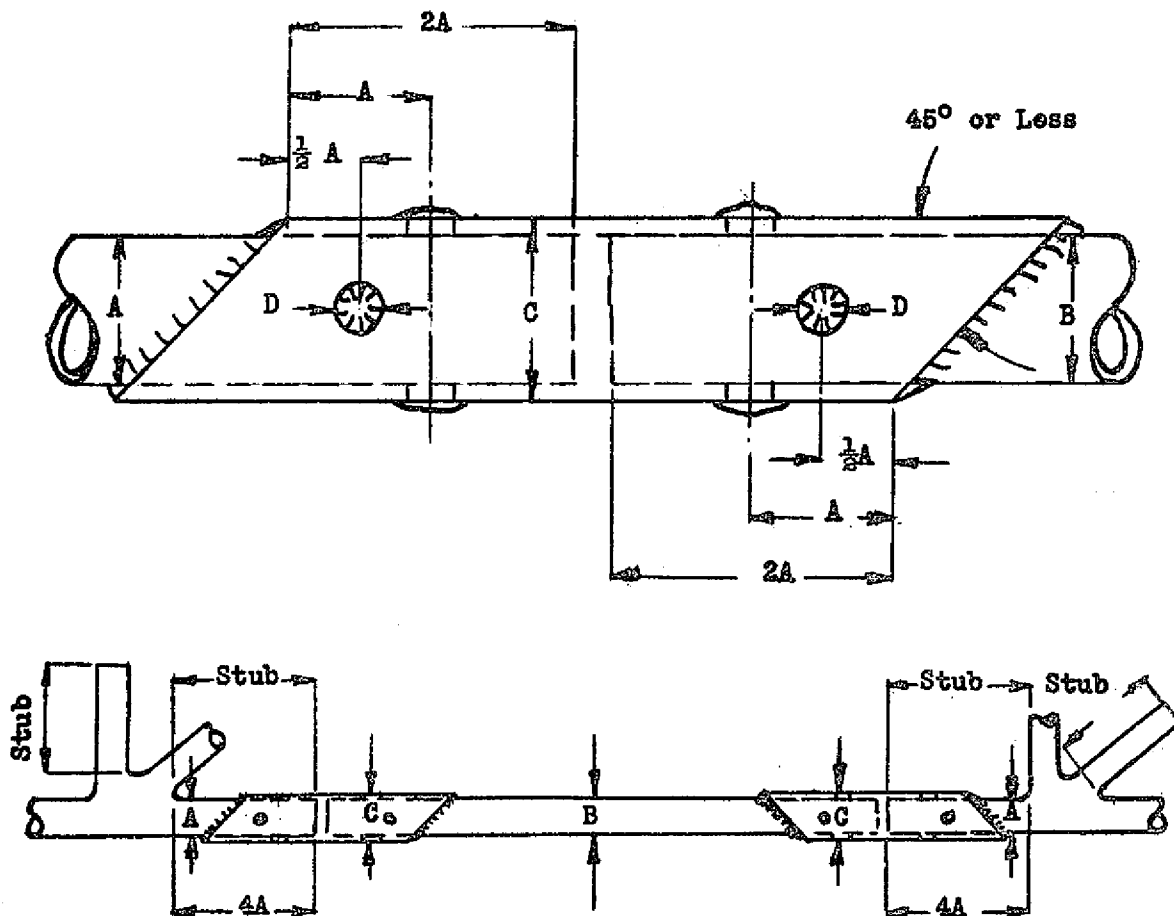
TYPE OF SPLICE USING OUTSIDE SLEEVE WITH FISHMOUTHED CUT.
